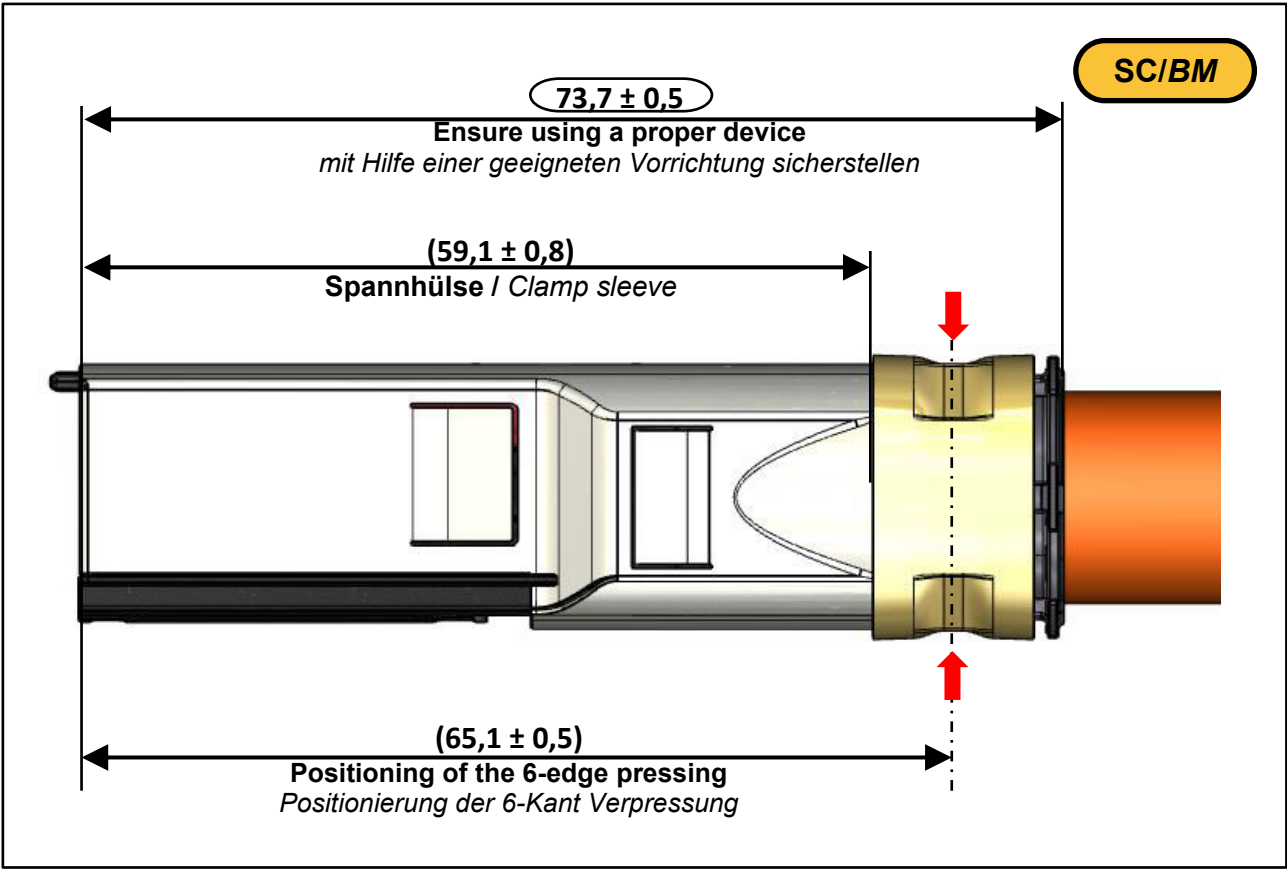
Dimensions of the pressing of the clamping sleeve
